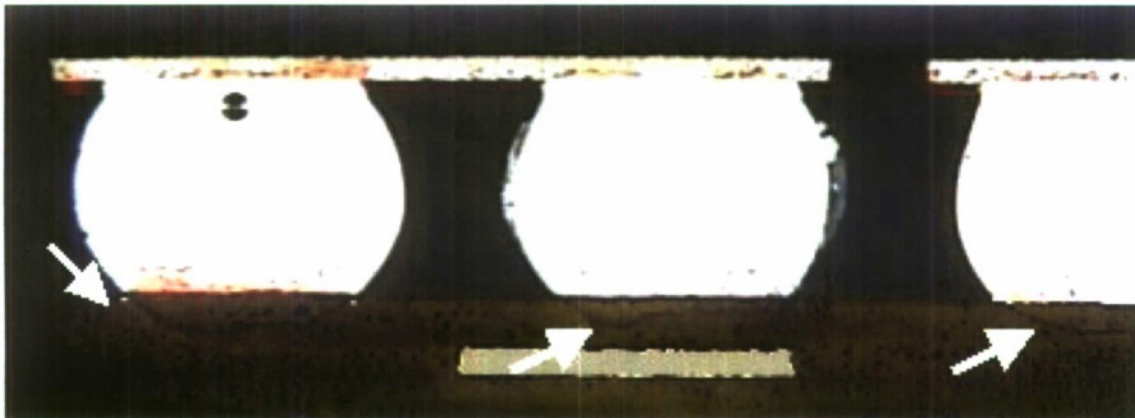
Cracked resin layer under pads for several solder joints, edge bonded
